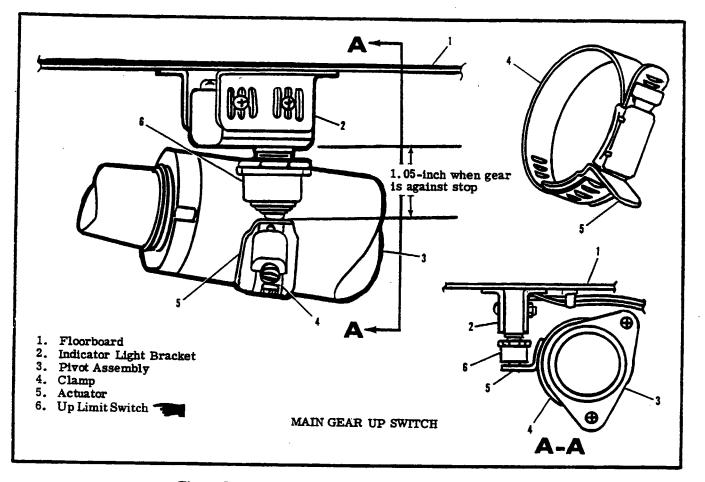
A-10. Rigging Main Landing Gear (Sheet 3 of 3)
